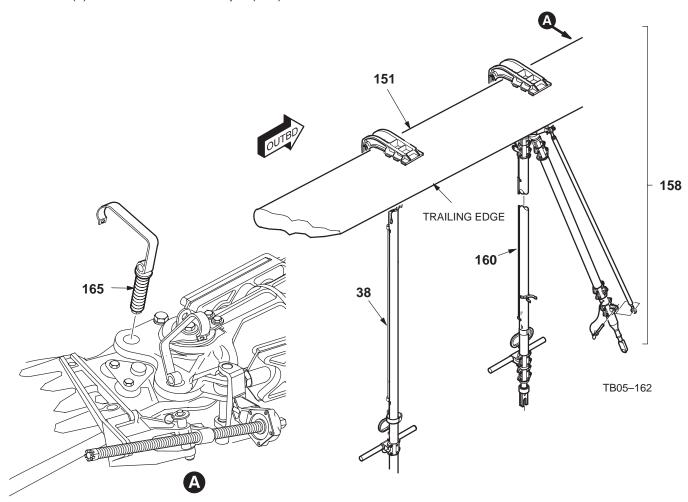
Aircraft Blade Pin from L/H FWD Blade Leading Edge
